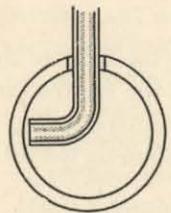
SECTION THROUGH HOLLOW KEY WITH RIGHT-ANGLE BORE
